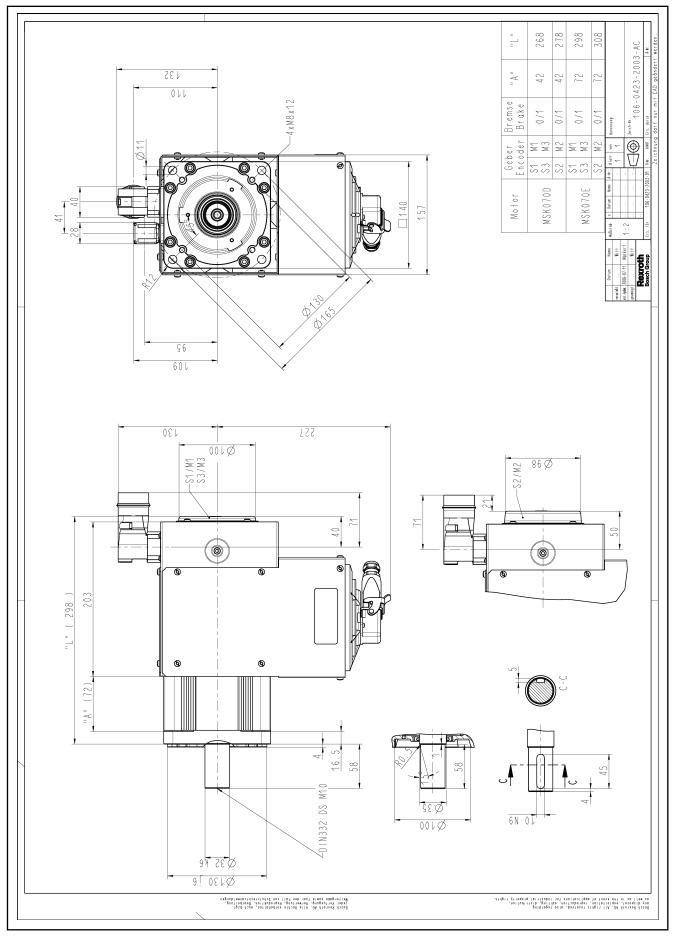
Dimension sheet MSK070 with radial fan unit
